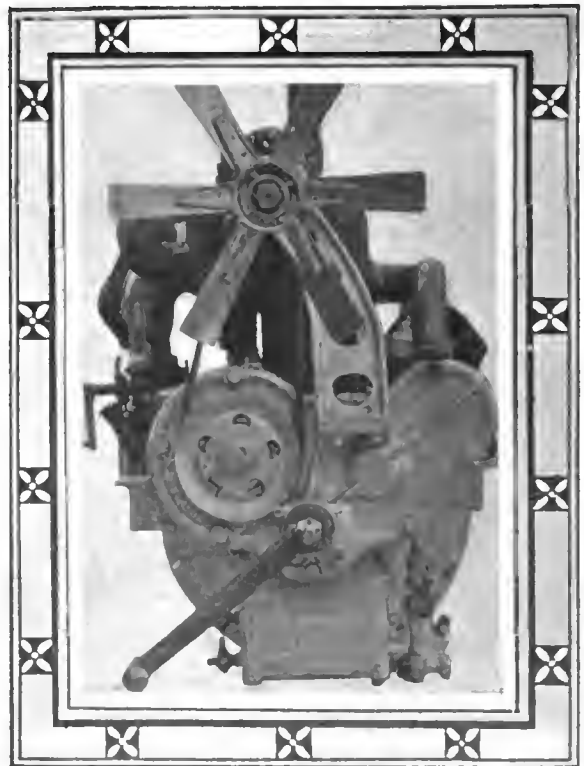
Front end view of the motor, depicting the encased half-time gear system, air propeller and starting crank.
